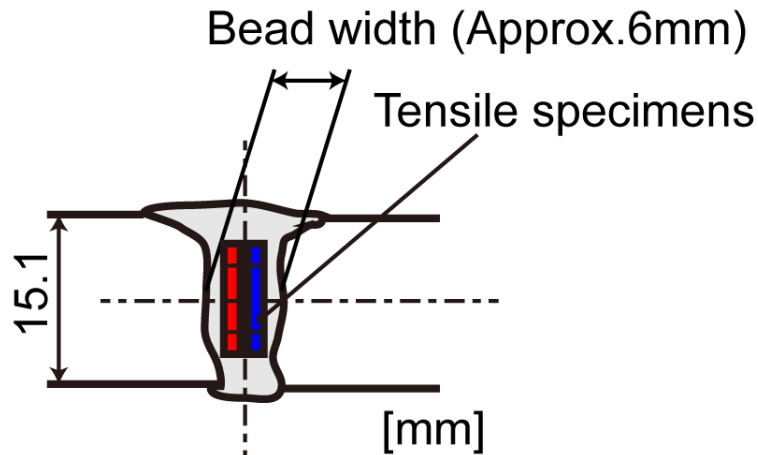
Transverse location of tensile specimens extracted from weld metal.
